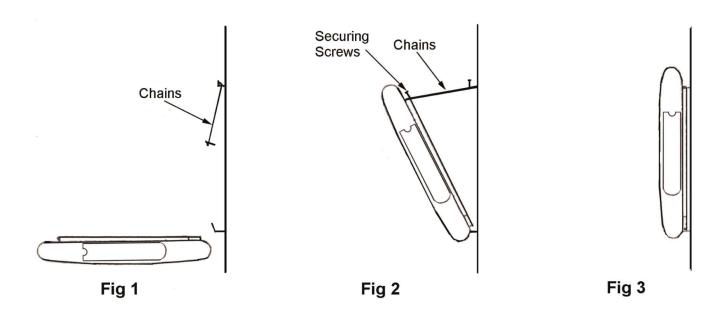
Locate the heater onto the bottom lugs via the 2 slots in rear panel. Hinge the heater upwards and reattach the chain assembly, then move the heater to the upright position. The link plates should slide under the slotted bracket lip.
